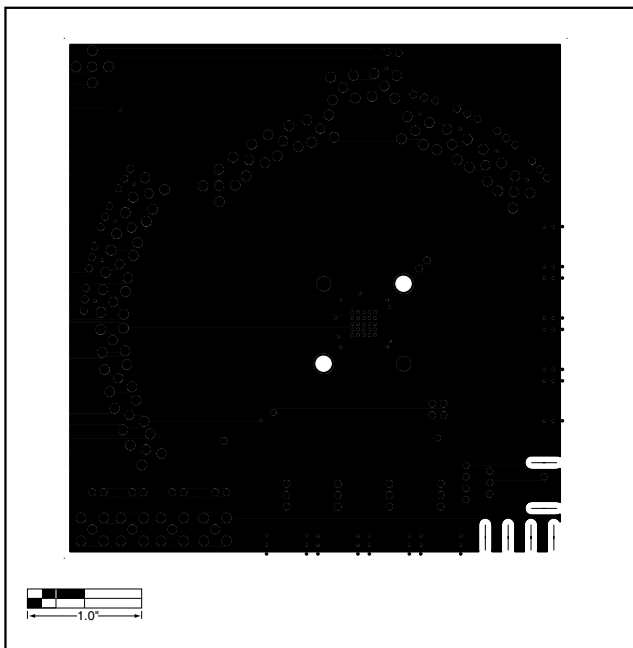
MAX3782 EV Kit PC Board Layout—Power Plane
